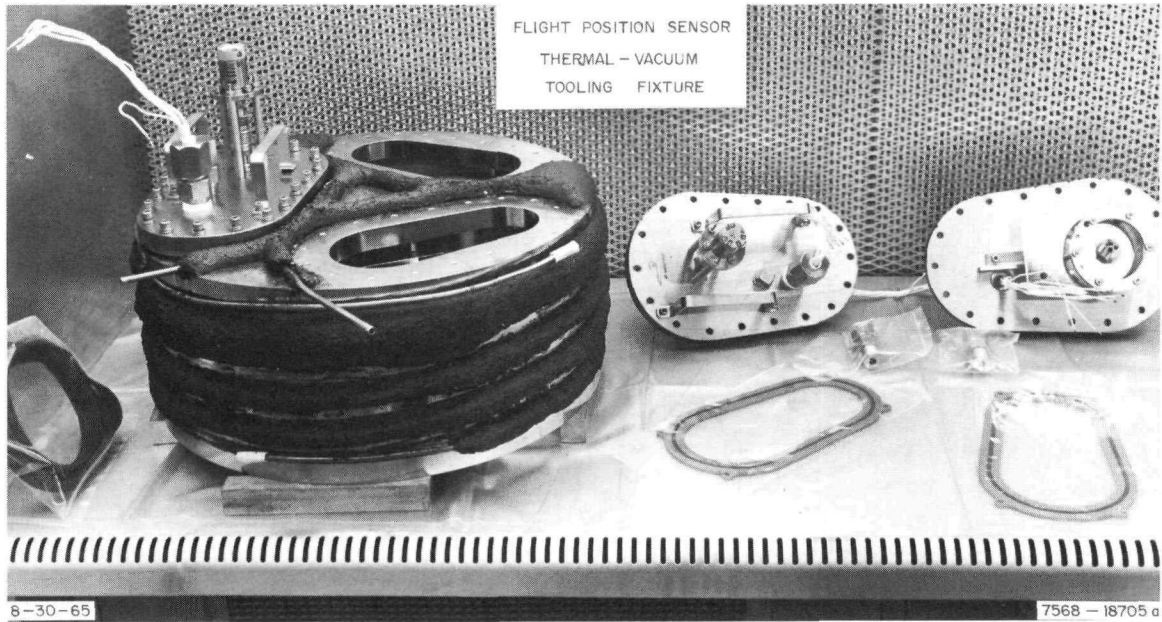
S8DS Flight Position Sensor Thermal-Vacuum Tooling Fixture
